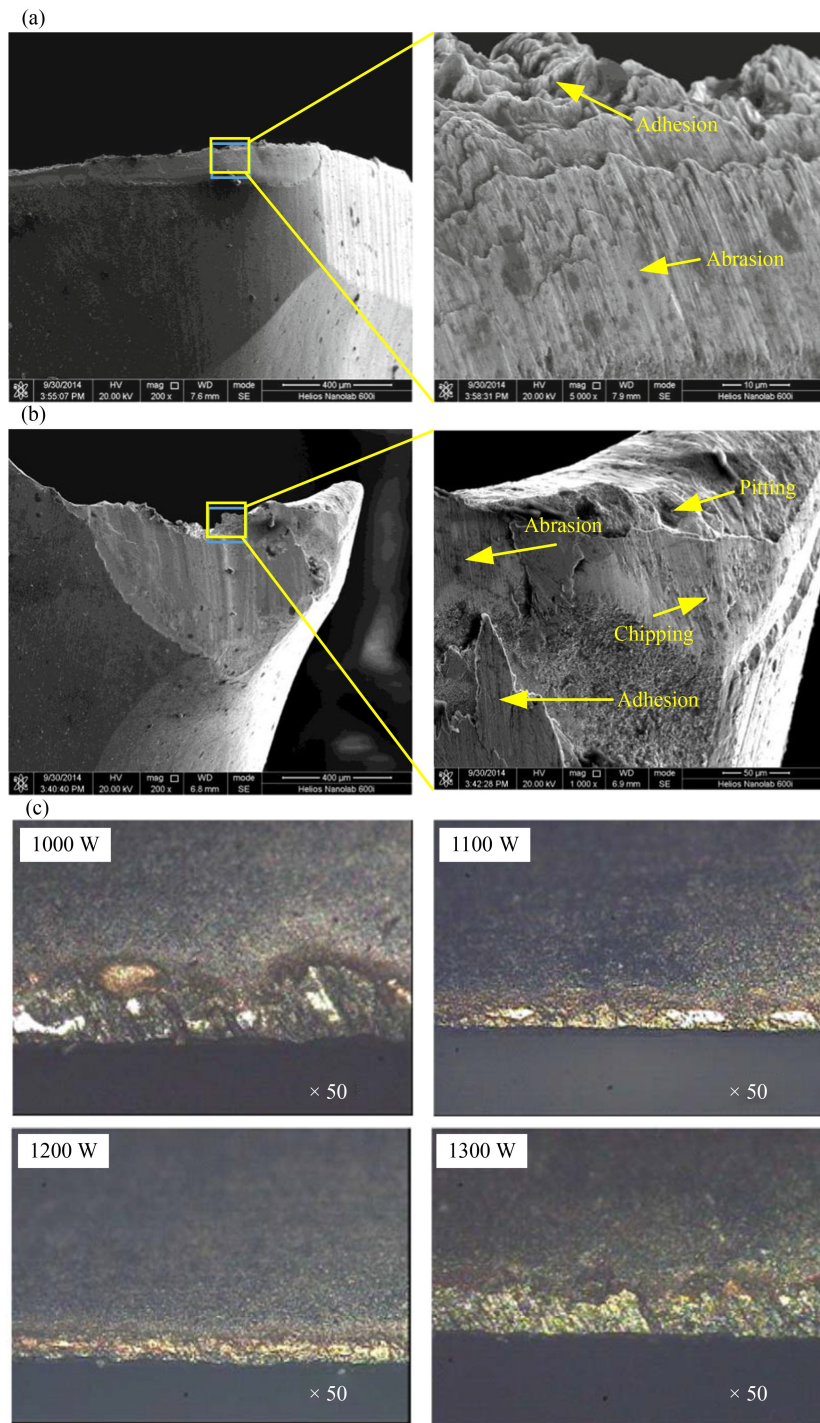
Flank face wear at different milling conditions: (a) scanning electron microscope of coated tool at 10s with laser-assisted milling, (b) scanning electron microscope of coated tool at 16.6 min with laser-assisted milling [148], and (c) scanning electron microscope of the coated tool at 20 mm with laser-assisted milling under different P_L [149]. Reproduced with permissions from Refs. [148,149] from Springer Nature and ASME.
